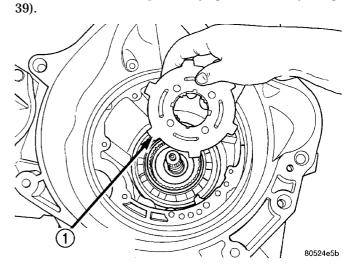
Rear Planetary Gear Assembly 1 - REAR PLANETARY GEAR ASSEMBLY
